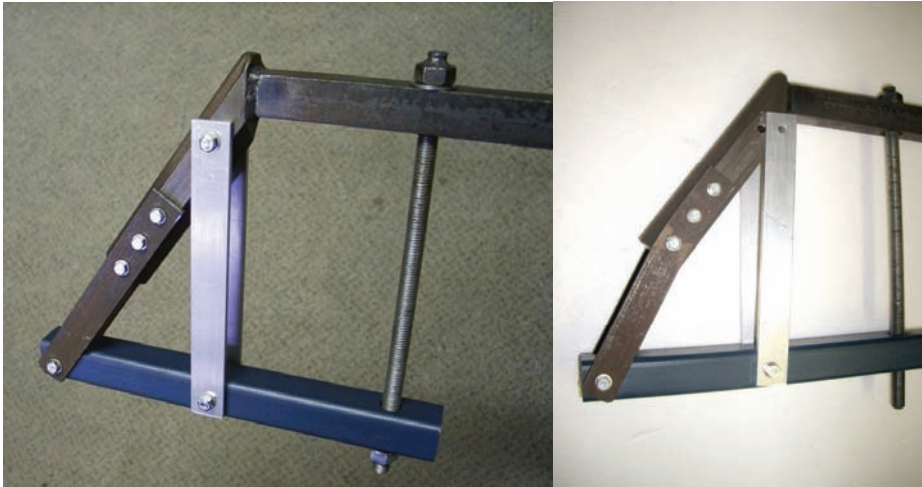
Fabricated frame from 2006 project: the failure occurred when the screws at the ends of the central columns sheared. The steel straps deformed plastically (right).
